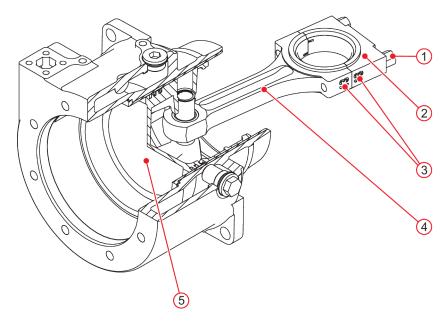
Pistons and connecting rods (example with compression stage 1)
